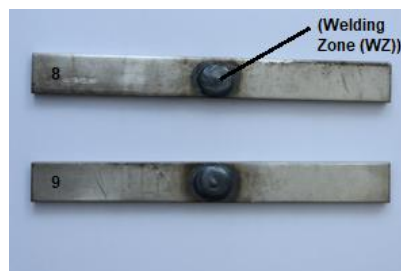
Samples of AA1050 that are welded with braze welding.
